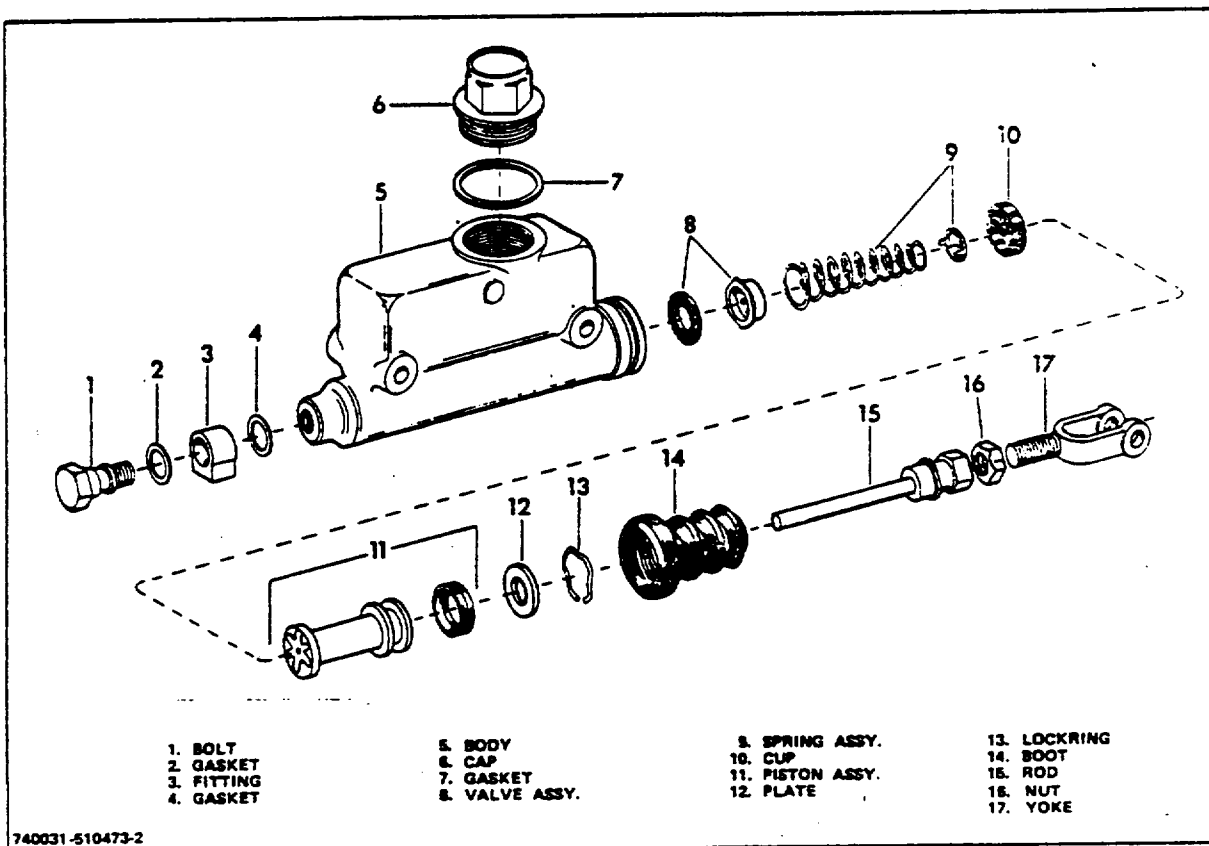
Type I Master Cylinder with Brake Pedal Linkage
